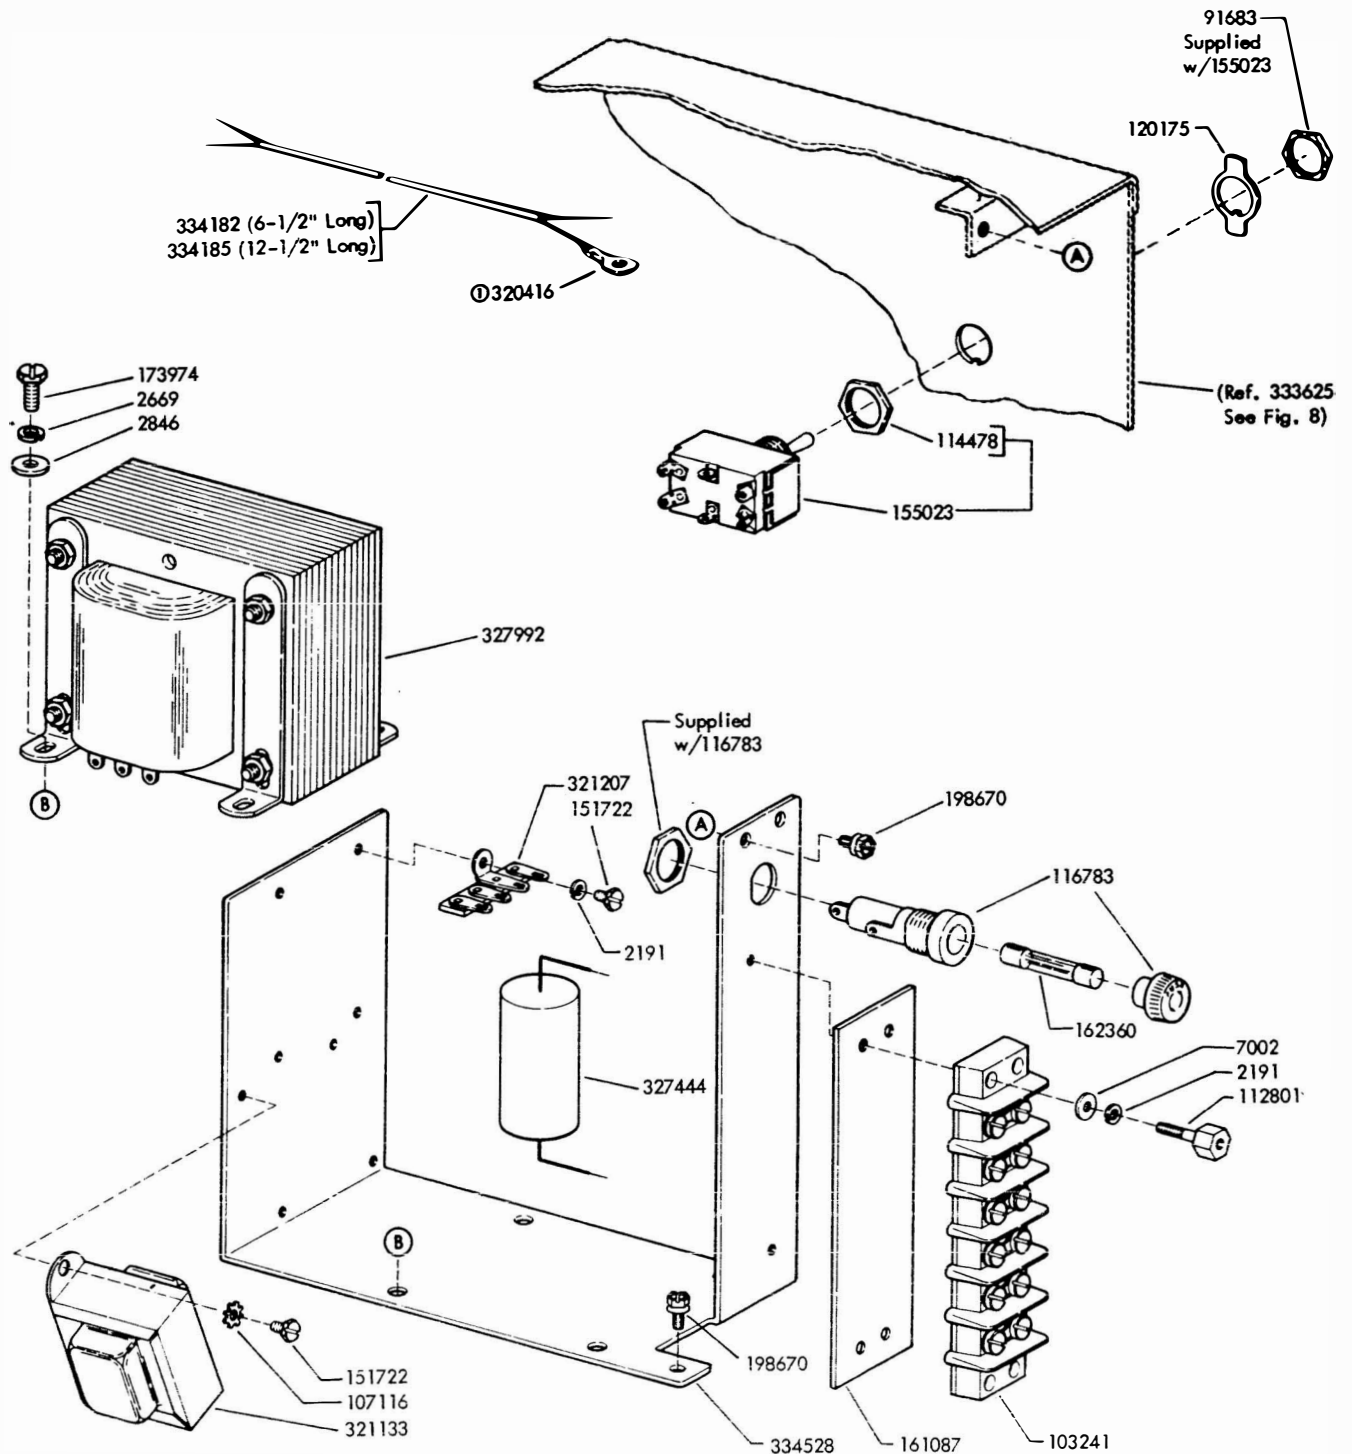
333605 POWER SUPPLY ASSEMBLY (Continued)
